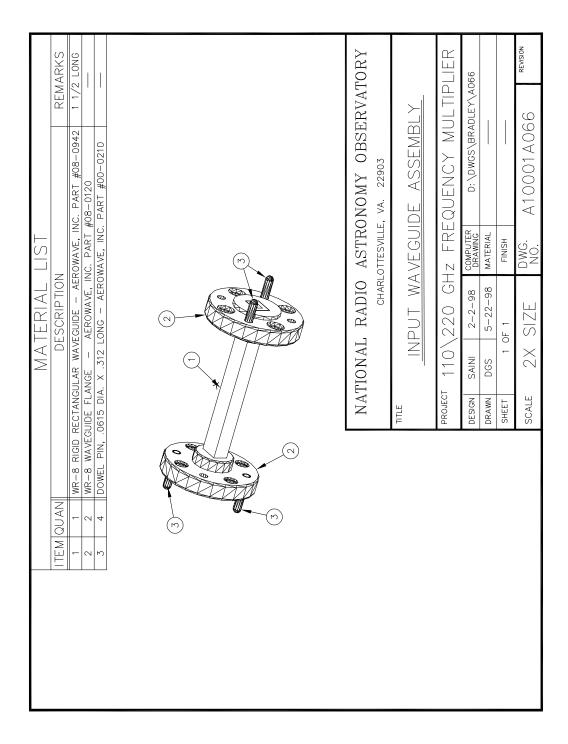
110/220 GHz frequency doubler: WR-8 input waveguide flange adapter assembly.
